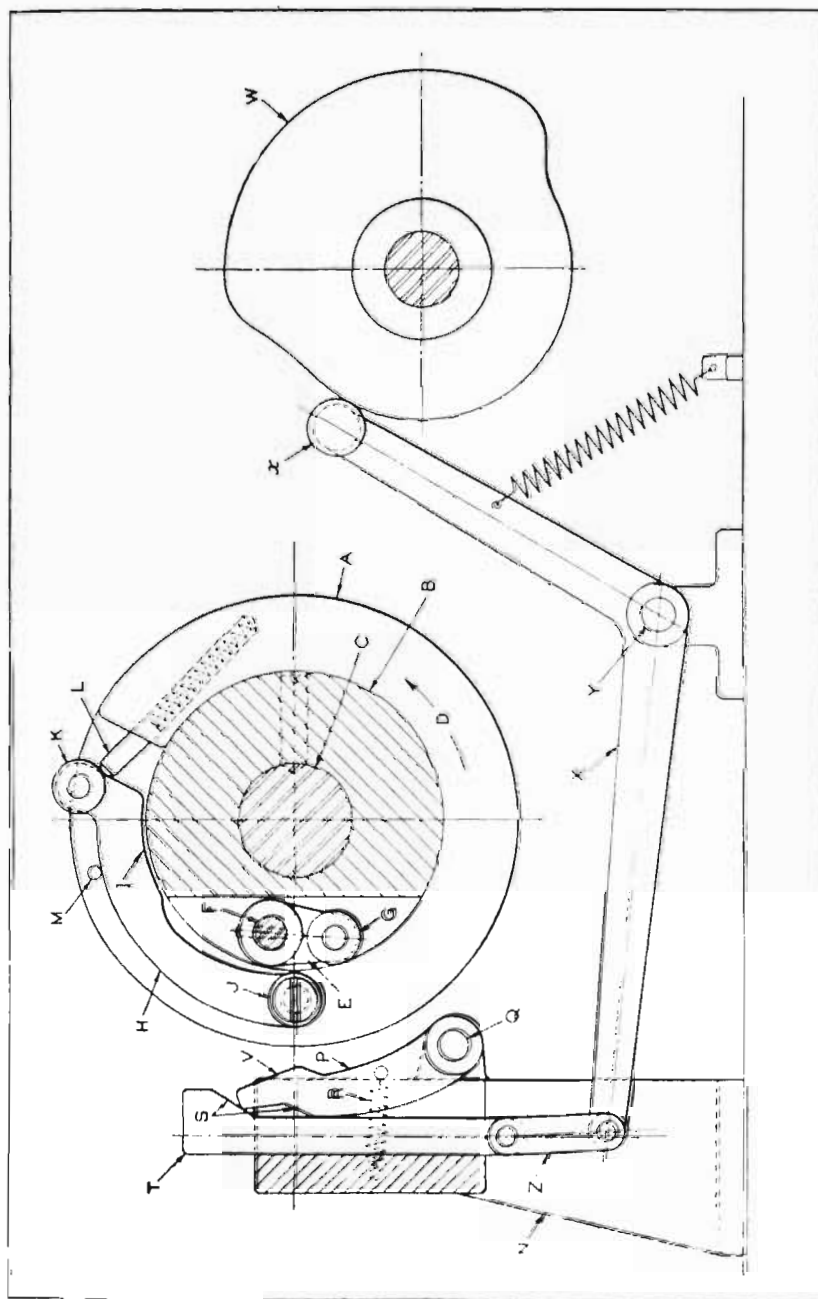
Mechanism for Operating a Trip-lever on Shaft F within the Revolving Head A.
